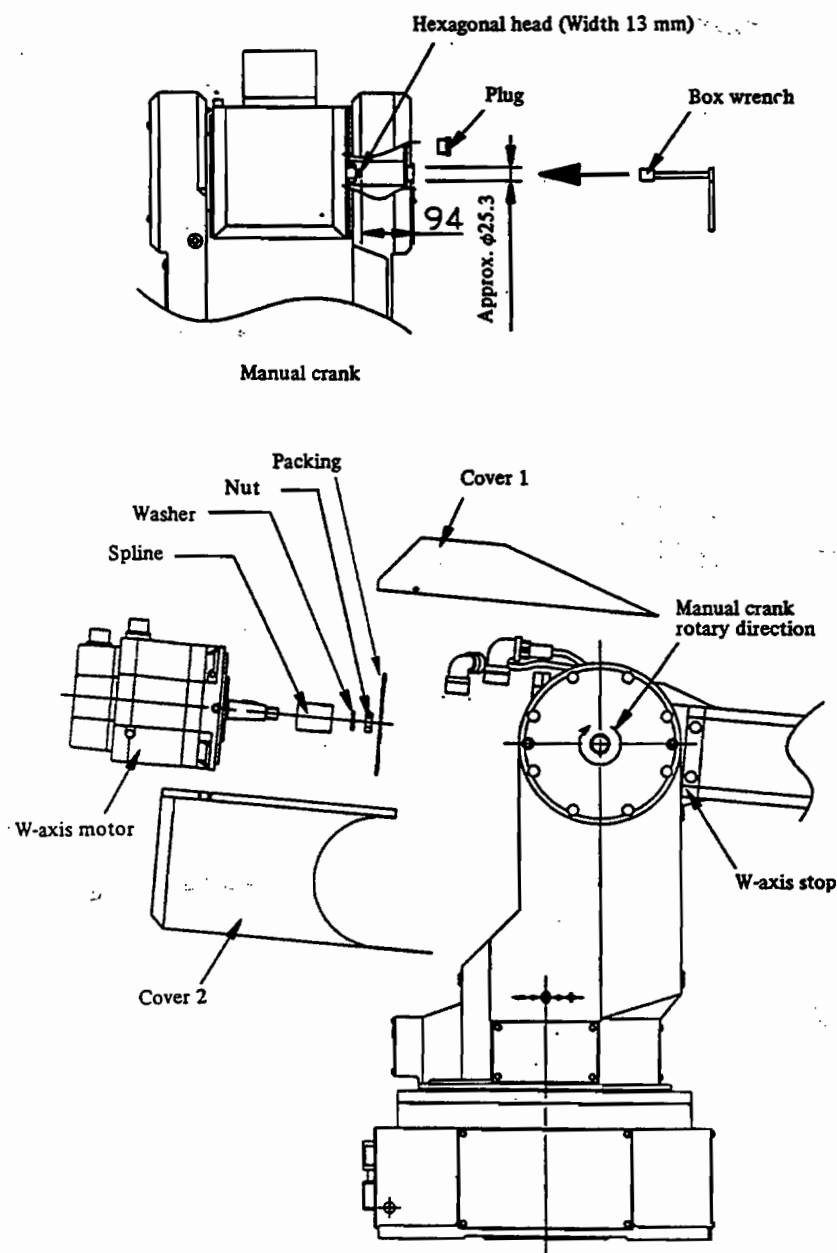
(a) Replacing W-axis motor (S-700)
